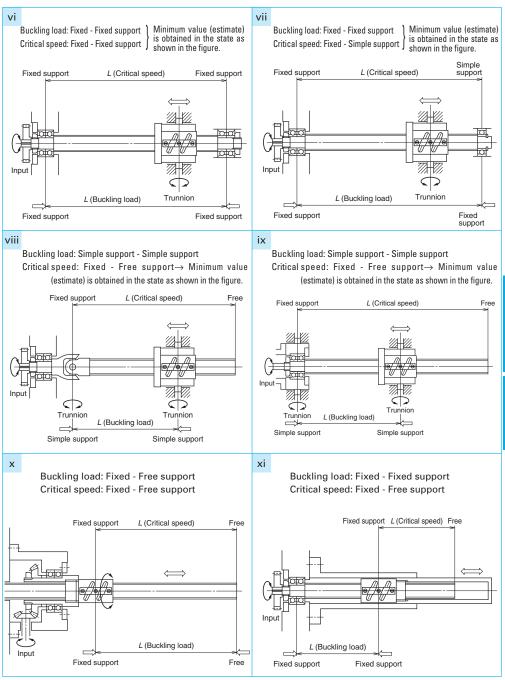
Supporting conditions of screw shaft and ball nut
